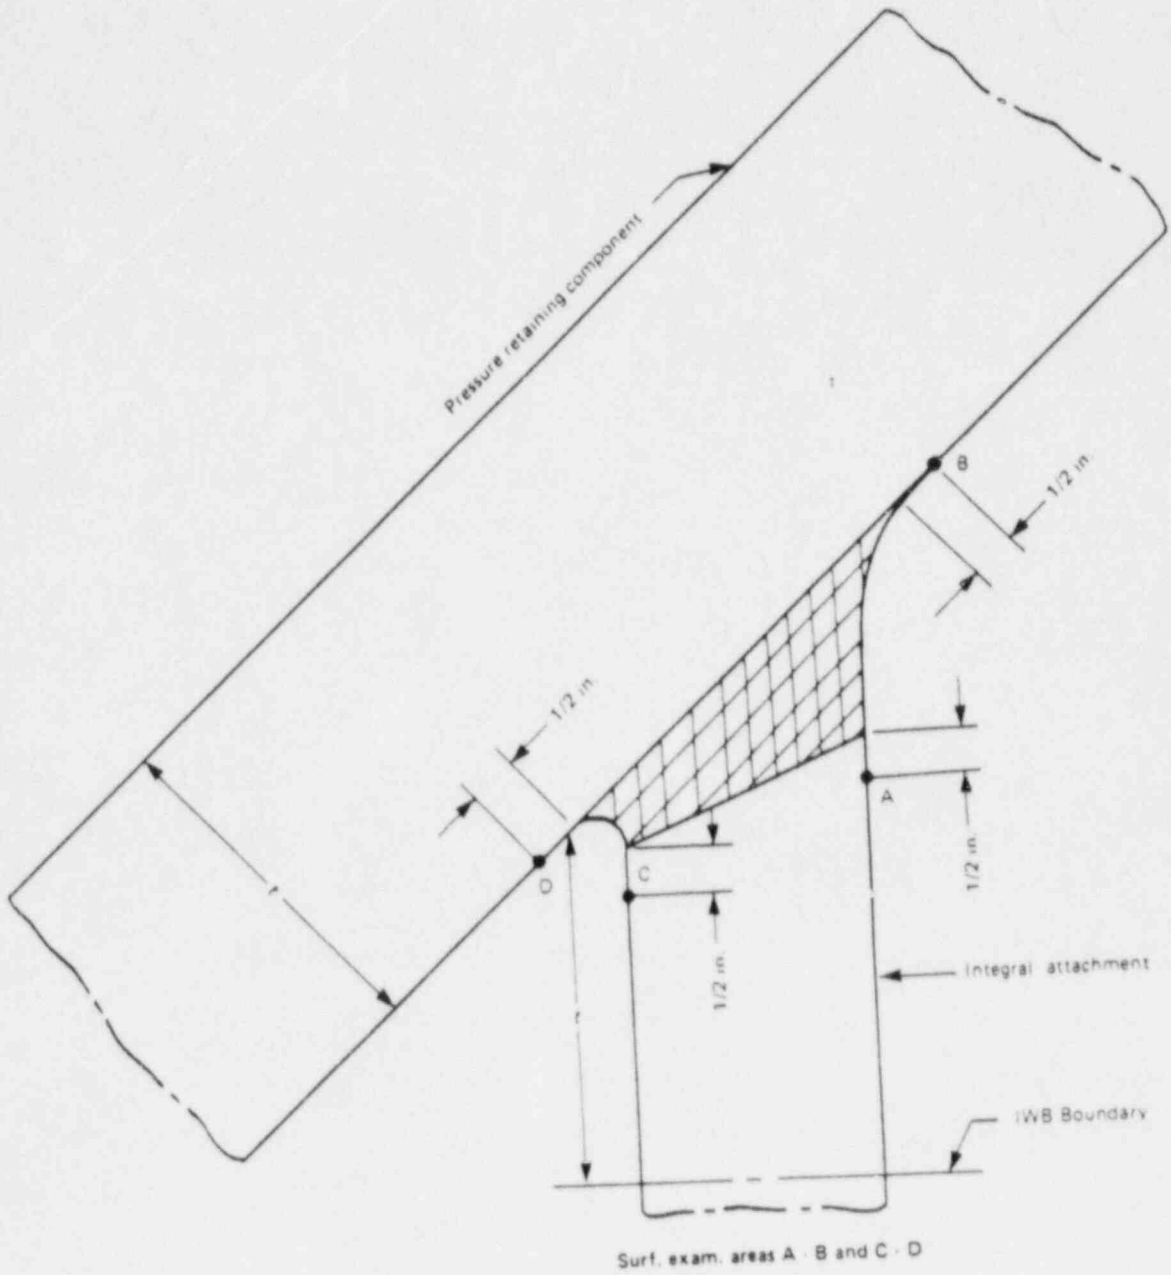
INTEGRAL ATTACHMENT WELD
